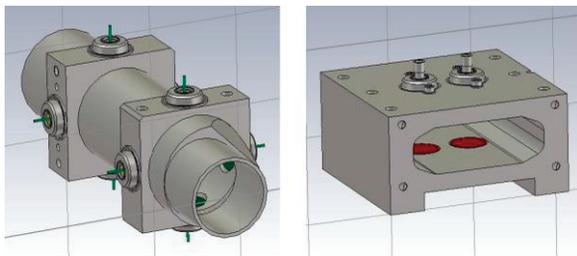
CST renderings, a) cylindrical beampipe section; b) rectangular beampipe section.
